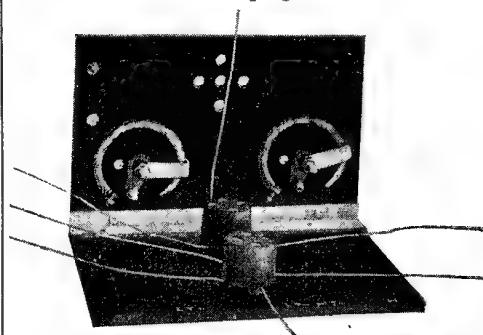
Valve holders are in position behind the low-frequency amplifier panel with wires soldered before assembly
